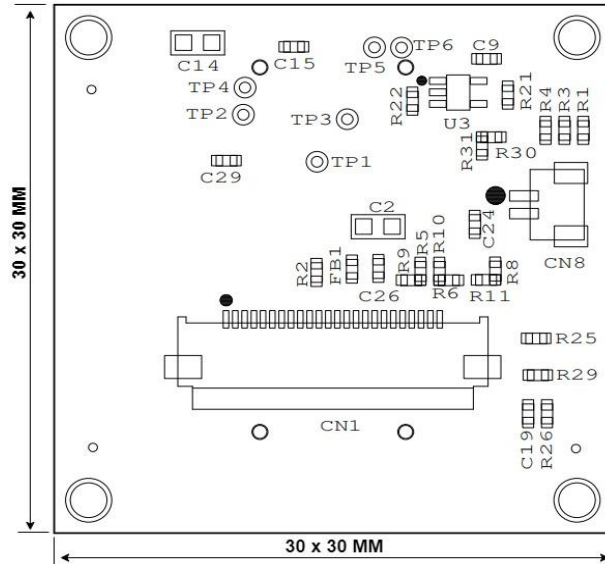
Rear View of e-CAM50_CUIMX8_H01R2 Camera Adaptor Board Mechanical Dimensions
